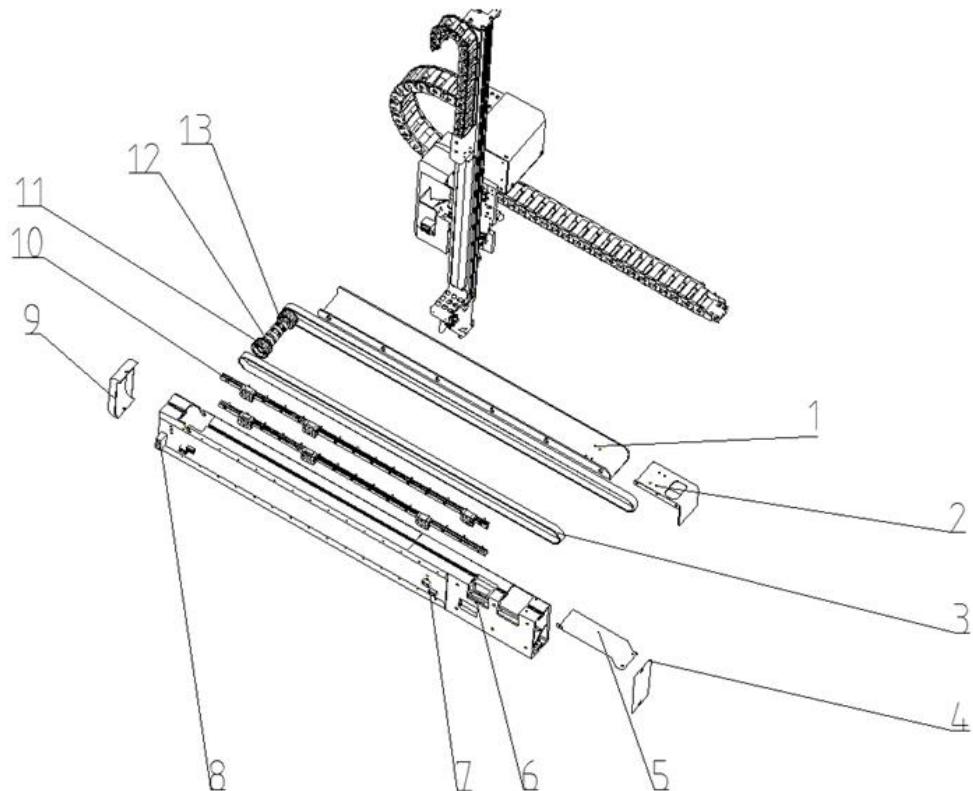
ST3 Crosswise unit (single-stage arm) exploded view
